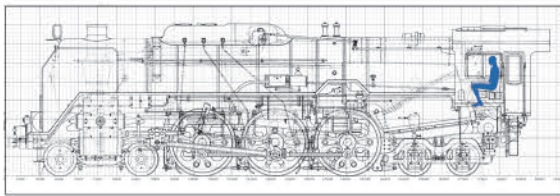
Steam locomotive C62, side view in 100 mm grids
